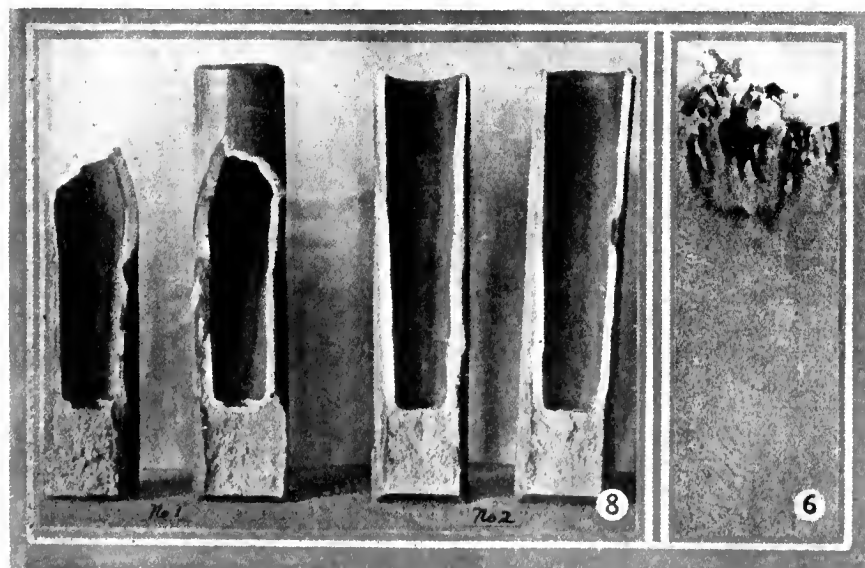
Etching on axis line to determine amount of segregation. Fig. 8. Shell forgings from blanks (1) and (2) of Fig. 7, split open for inspection.
